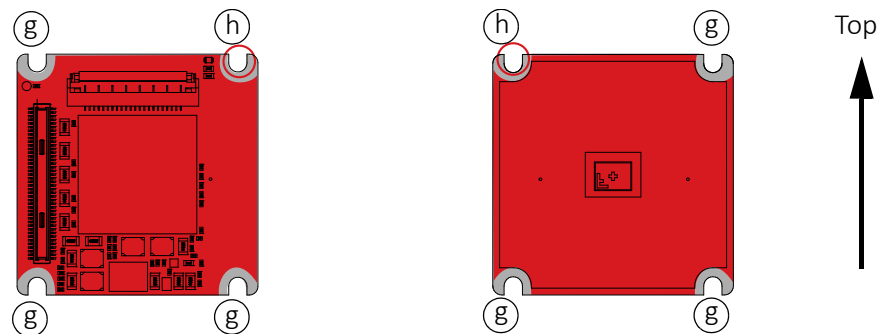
Mounting area of Alvium G1 BL No Mount cameras connector side (left); sensor side (right)
